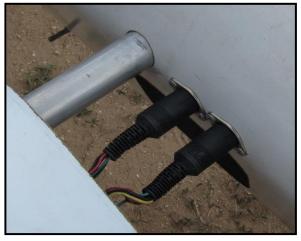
Connect both wing control cables to airframe. Confirm secure connection before continuing with wing assembly.
